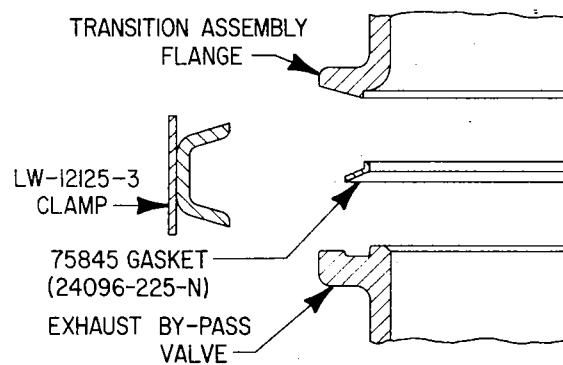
Diagram of Section Thru Transition and Exhaust Bypass Valve Showing Details of Clamp and Gasket Assembly
